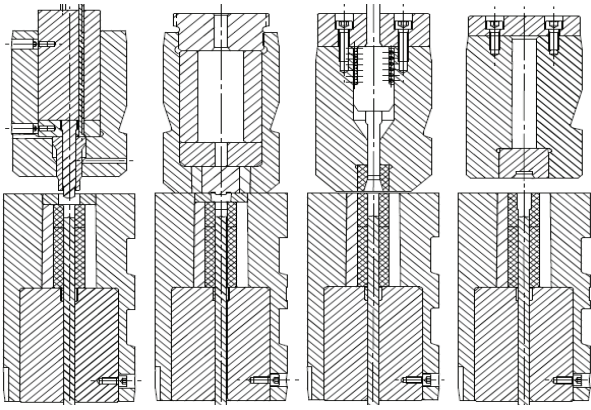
Modified tools for forging of the investigated screw M6x20.
